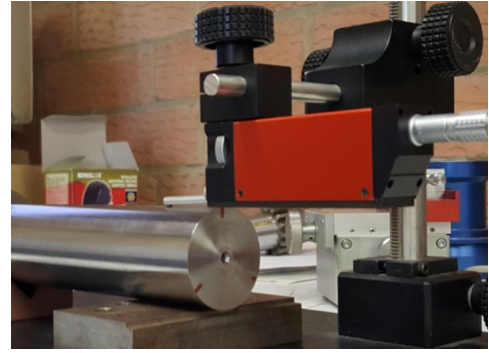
Diavite DH-6 roughometer and a machined workpiece. The lines drawn on the workpiece indicate the localization of the measured surfaces on the cylinder.
